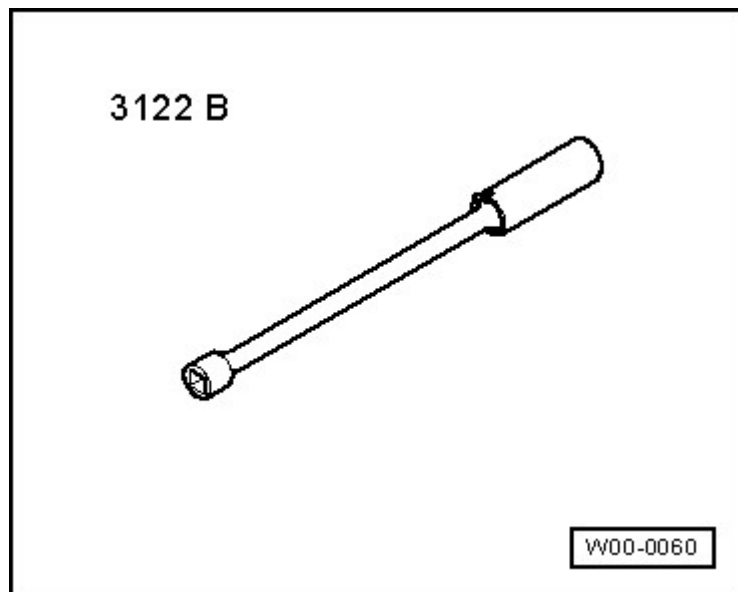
Identifying Special Tools -- Valve Stem Seals, Replacing
